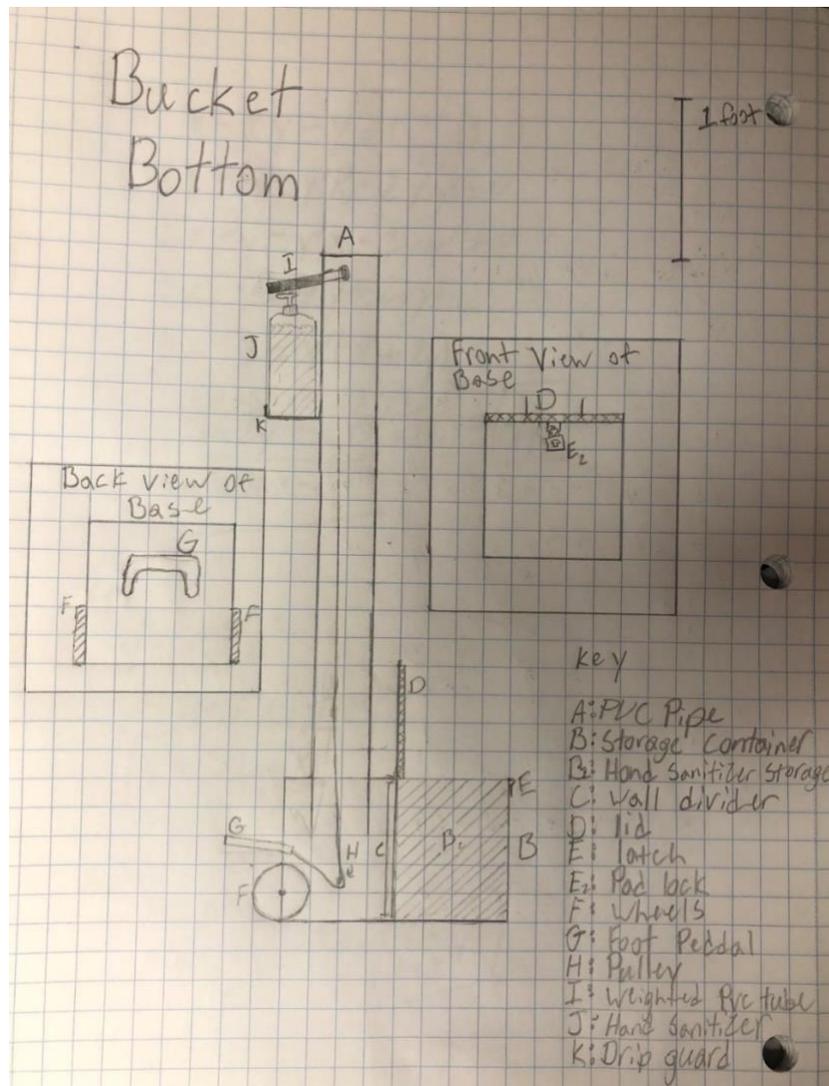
Initial Sketch of Bucket Bottom Design (Drawing by Drake Pitchford).
